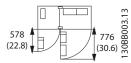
Space in front of IP21/IP54 enclosure type, frame size F9
